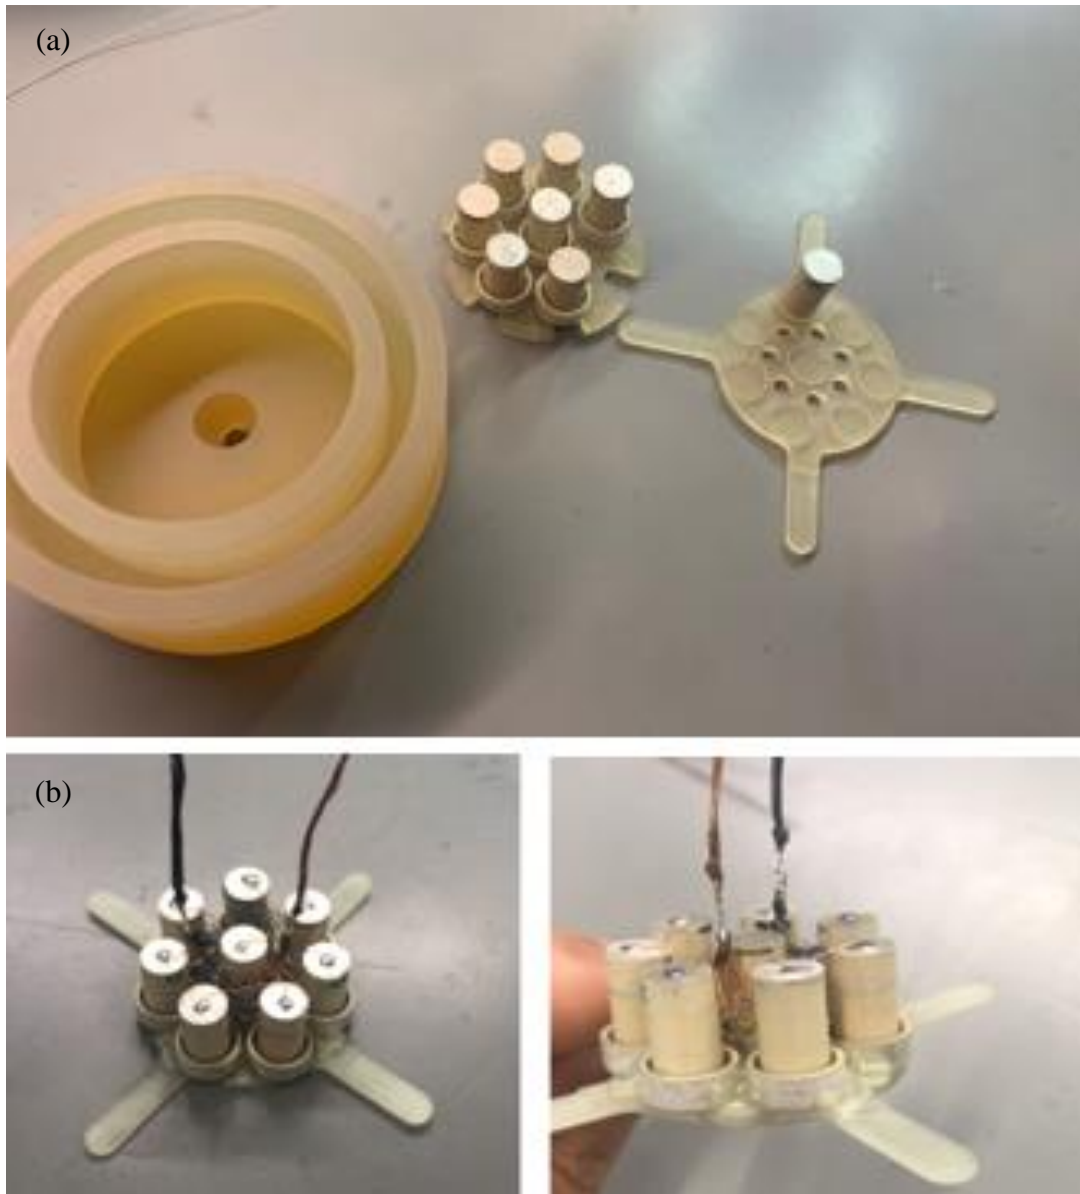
(a) The manufactured shell piece and soldered piezoceramics, (b) Third production apparatus
